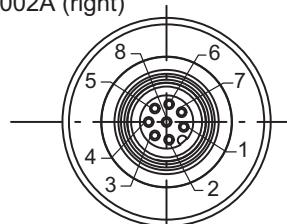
Connector socket, 8-pin; this side has an M12 internal thread (for HBM cable 1-KAB165) and an M14 external thread (for HBM cable 1-KAB173); you can connect commercially available M12 plugs via the M12 internal thread
